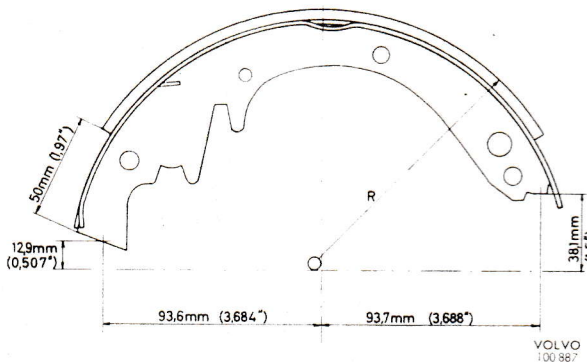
Adjusting measurements for rear brake shoes on front wheels.
